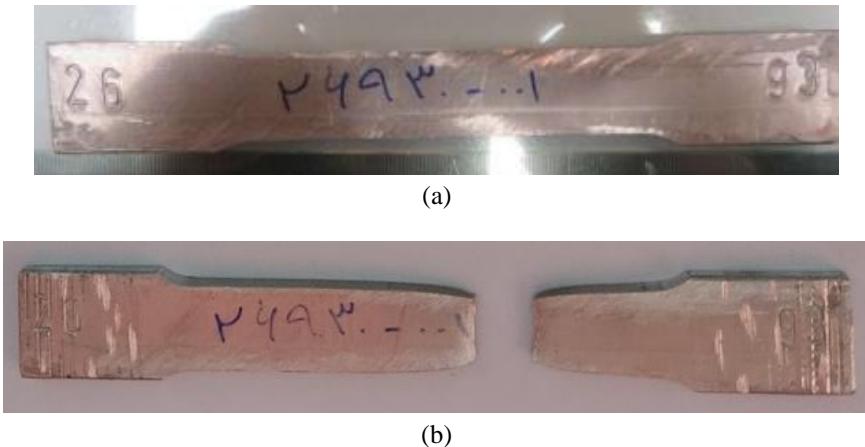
Tensile test specimen (a) Before testing (b) After testing
